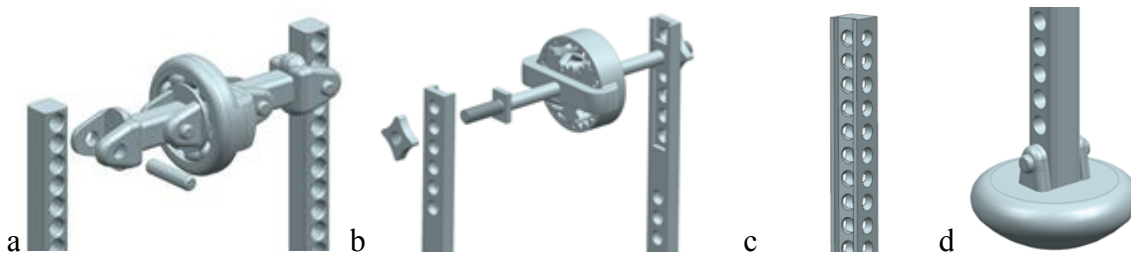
Legs, Feet and Connection. a: Pin Connection. b: Screw Connection, c: Leg, d: Connection Feet – Leg
